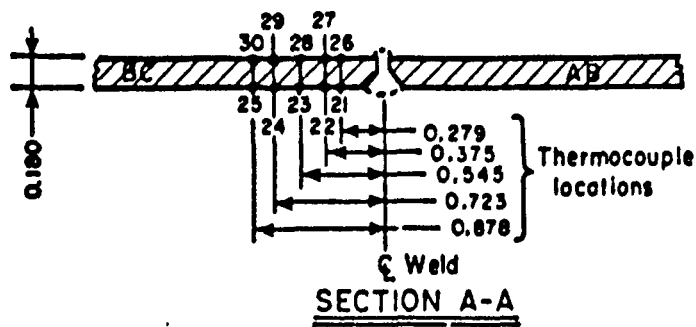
THERMOCOUPLE LOCATIONS FOR TWO-PASS WELD
